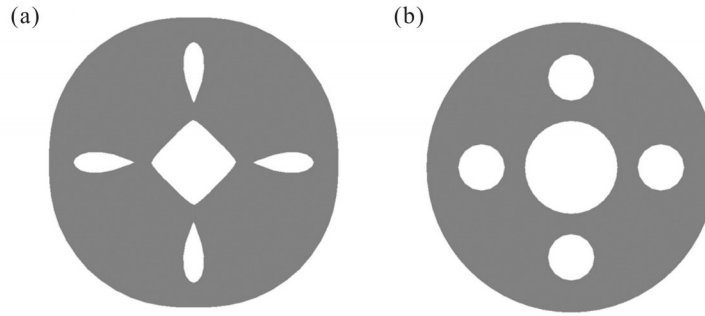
Cross-sectional deformation of the catheter end: (a) traditional extrusion; (b) gas-assisted extrusion
